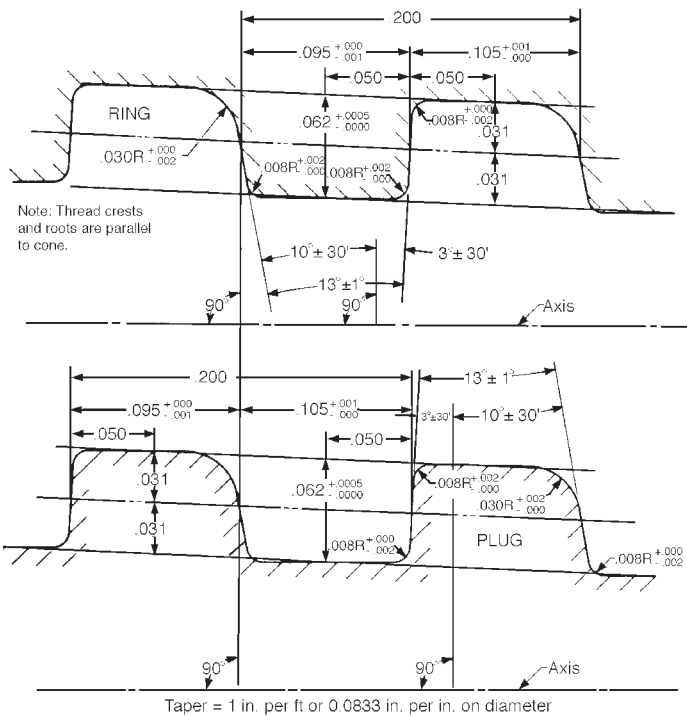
Gauge Thread Form and Dimensions for Buttress Casing
